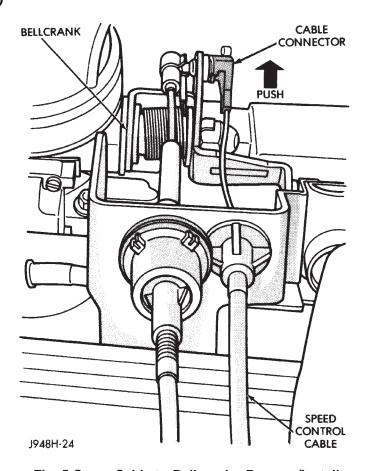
Servo Cable to Bellcrank—Remove/Install
